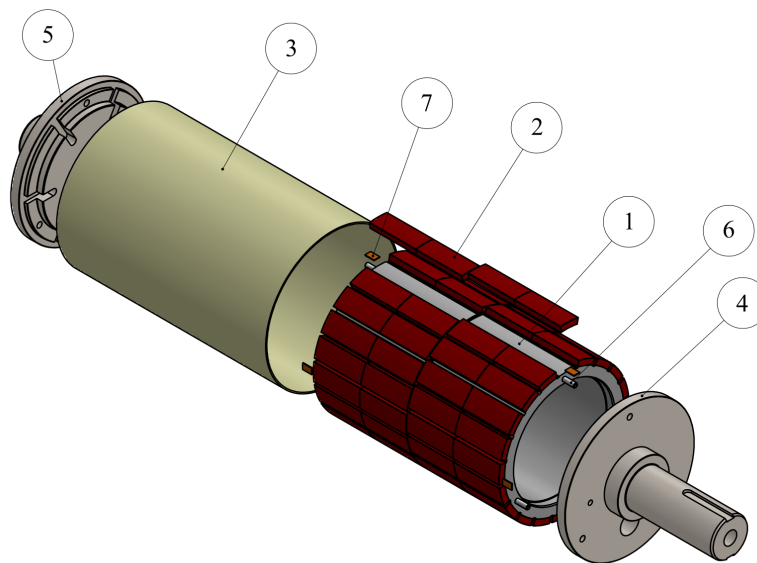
Exploded view of the rotor assembly: (1) tube, (2) PM, (3) cover, (4) drive end ring, (5) non-drive rotor end ring, (6) ring attachment screw bolts, and (7) wedge to center the fiberglass tube.
